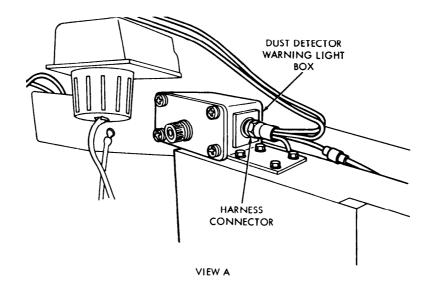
Dust detector warning light wiring harness assembly replacement (sheet 2 of 2).
